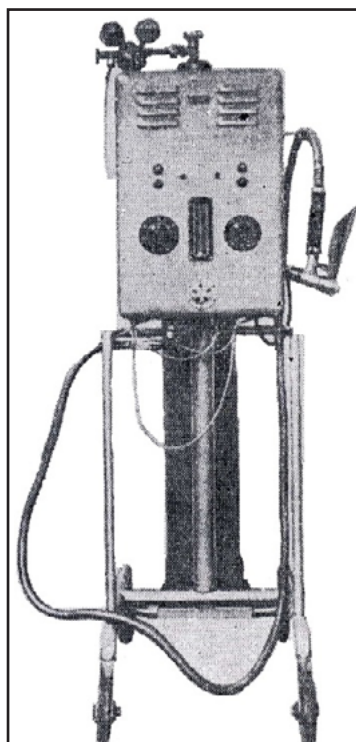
Poland's first manual TIG welding machine [34]
